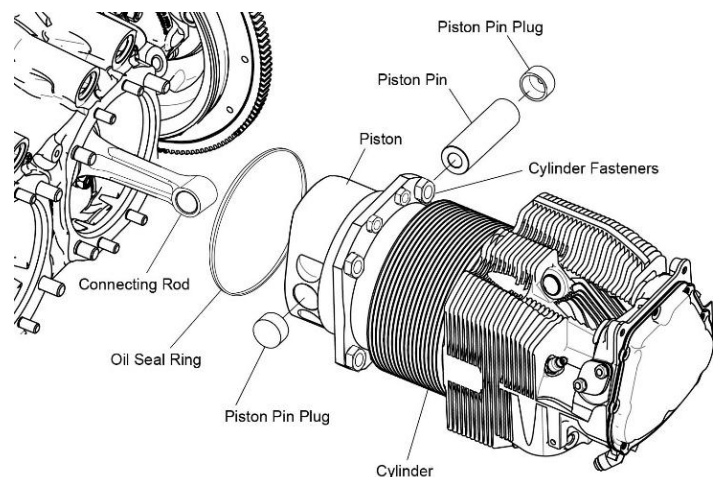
This sketch shows the Lycoming Cylinder assembly with the piston detached from the connecting rod. This method of dismantling allows the small end bearing to be inspected for movement without removing the piston from the cylinder.
